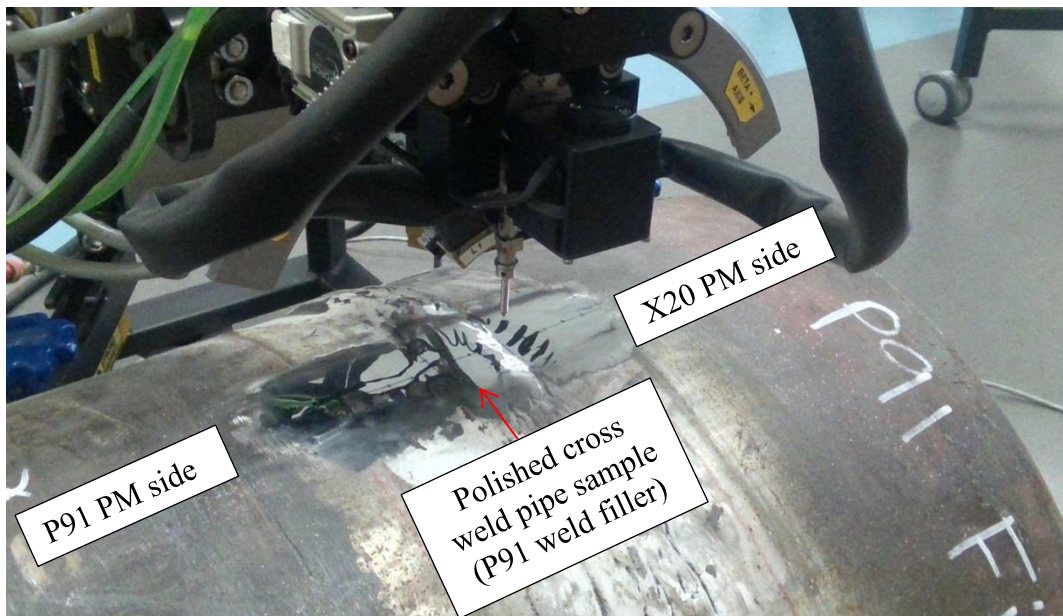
Photograph of a close-up view showing a set-up of a laboratory X-ray diffraction residual stress measurement technique being applied on a mechanically polished ($3\mu\text{m}$ surface finish) cross weld pipe sample.
